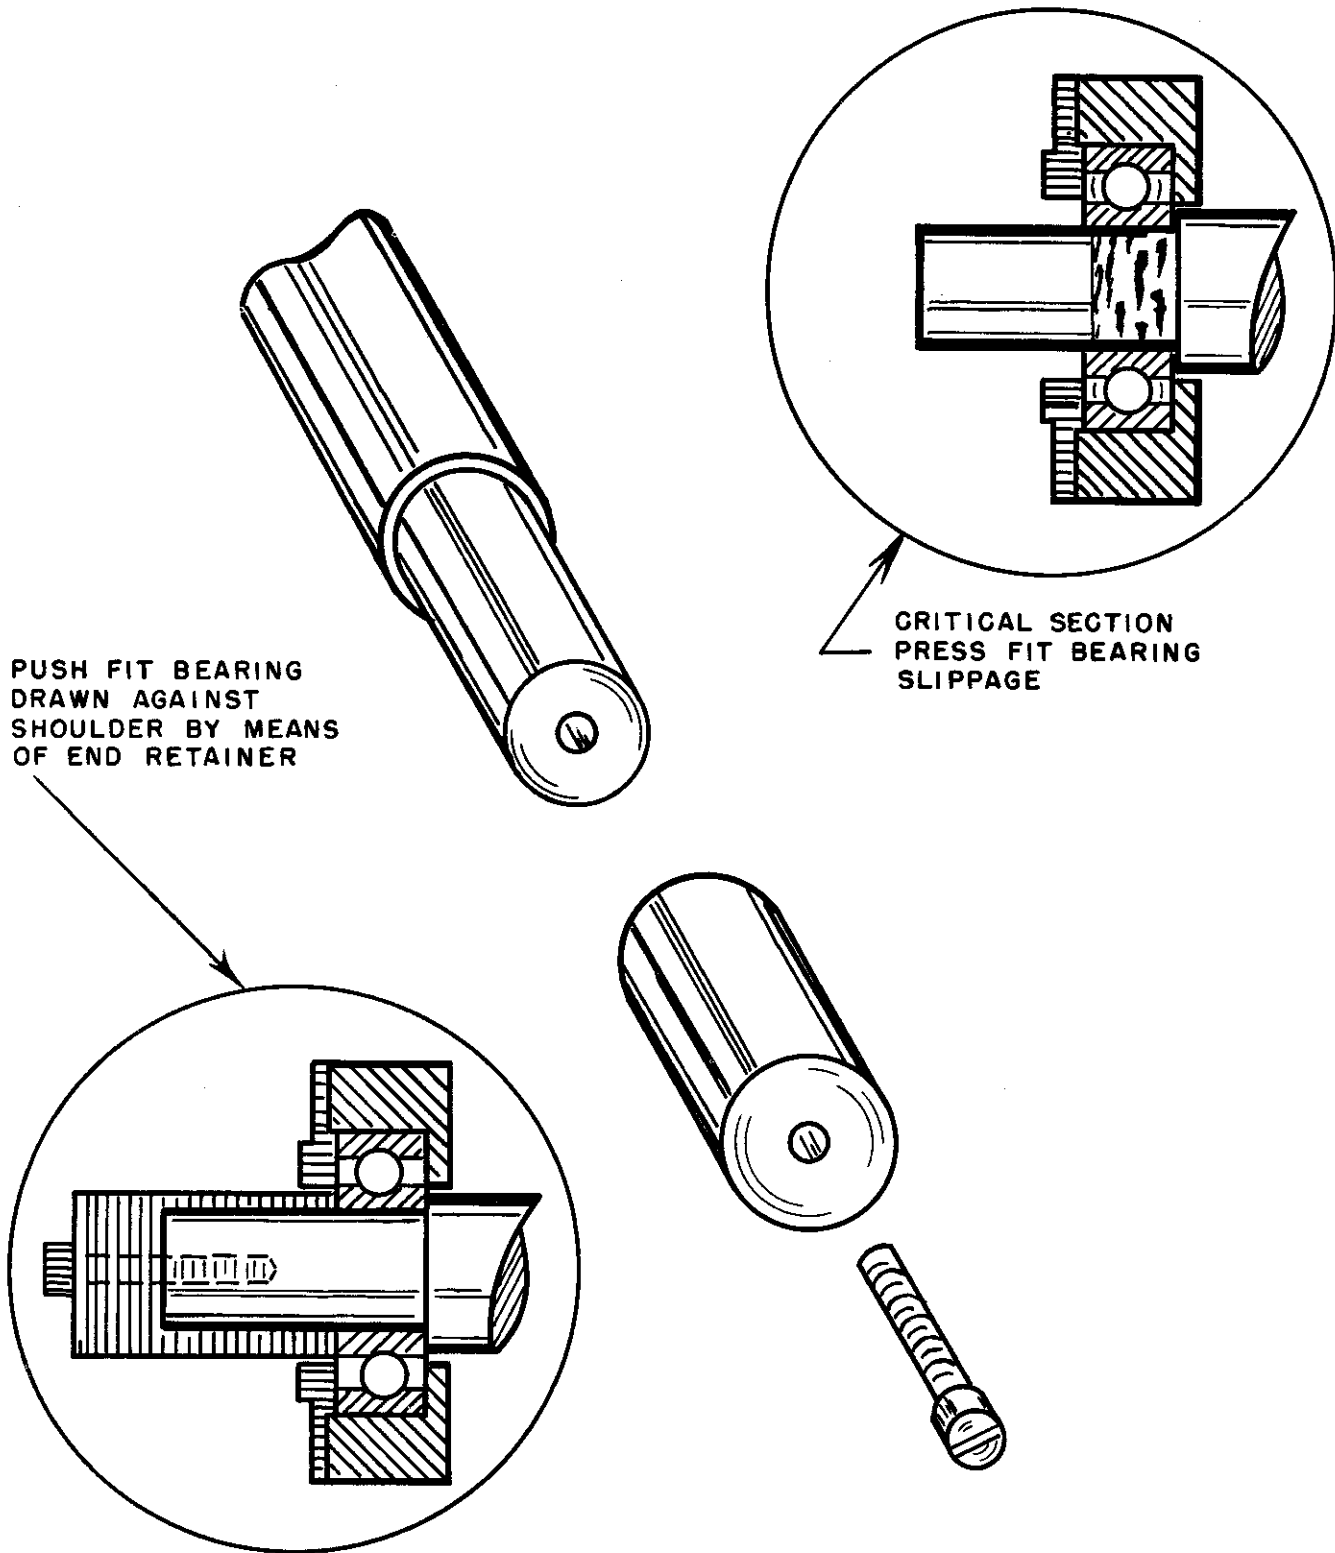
IMPROVED METHOD OF RETAINING TEST BEARING
